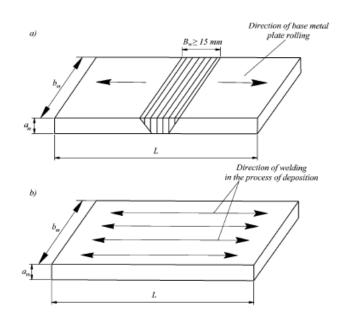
sistance to intercrystalline corrosion: a - of weld metal in the welded joint; b - of deposited metal in the cladding deposit
